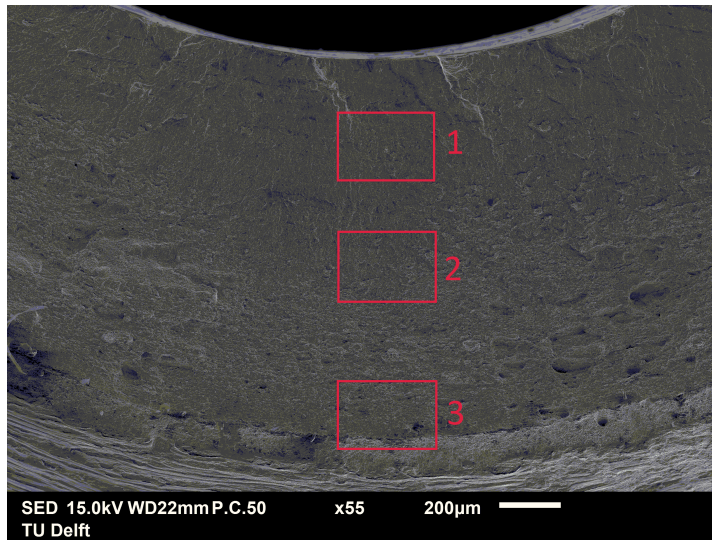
A 45° tilted view of the fracture surface of a WM specimen tested in 70 bar H₂.
